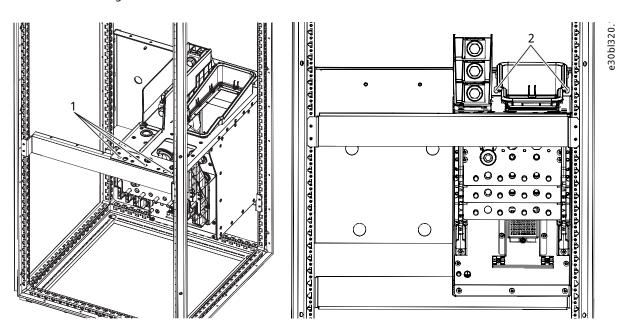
Front and Back Screws of the Short Integration Unit, IR10, IR11
